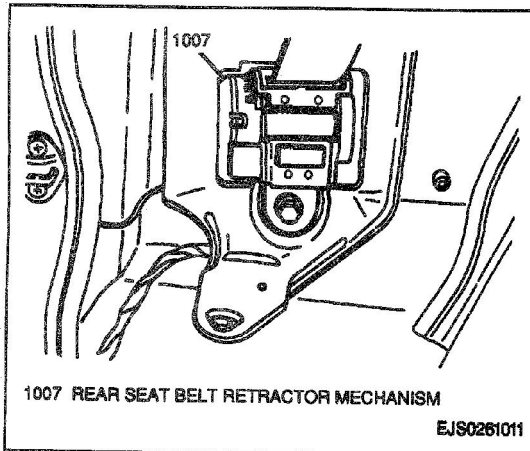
Rear Seat Belt Retractor—Two - Door Model
